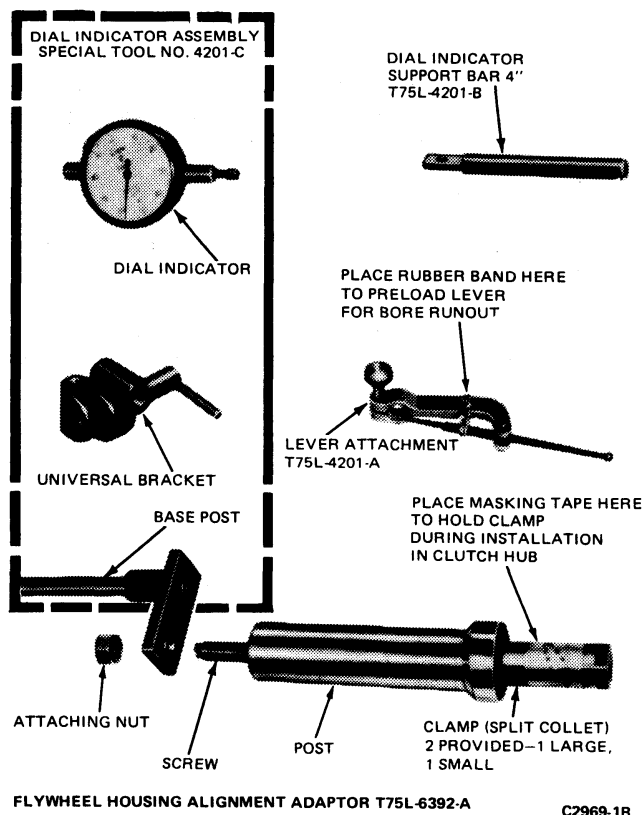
Special Tools—Flywheel Housing Inspection and Alignment
